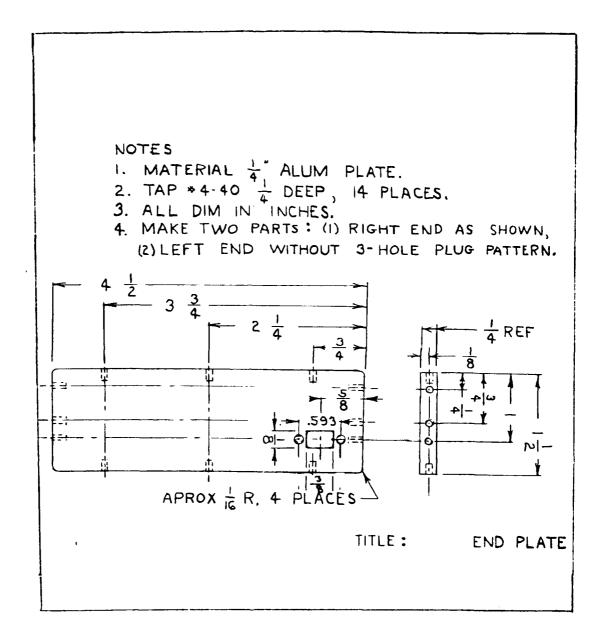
Flight Recorder Mechanical Drawings, Sheet 2 of 6
